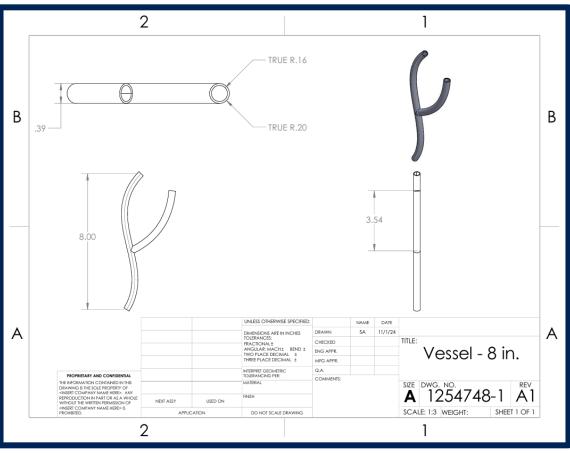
Drawing of Component [PN: 1358785-1A_8 in. Vessel]
